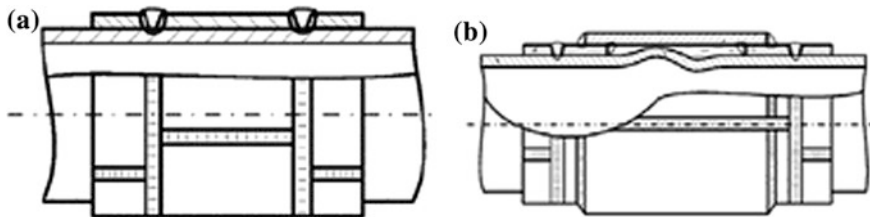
Structure of hermetical steel sleeves: a sleeve with technological rings; b bulk sleeve with fillers
